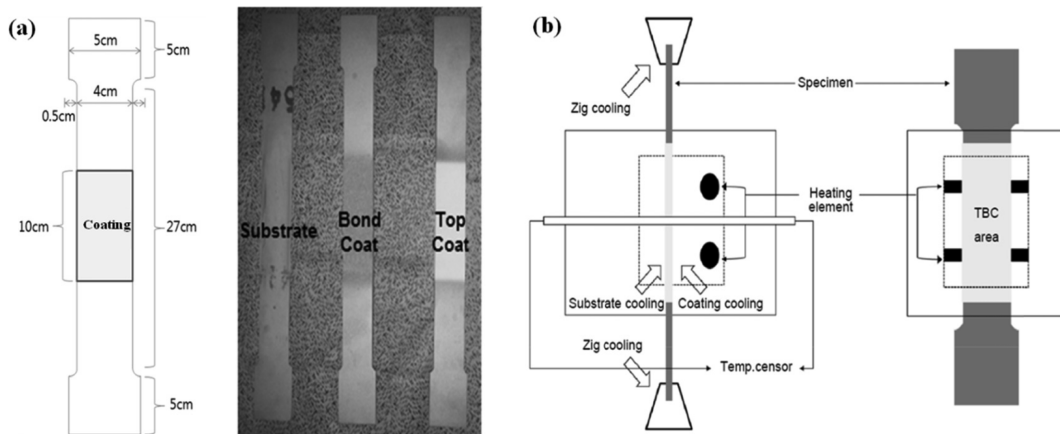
TBC specimen and testing system: (a) specification of prepared TBC specimens and (b) schematic picture of thermal fatigue testing machine using electric furnace [14].
